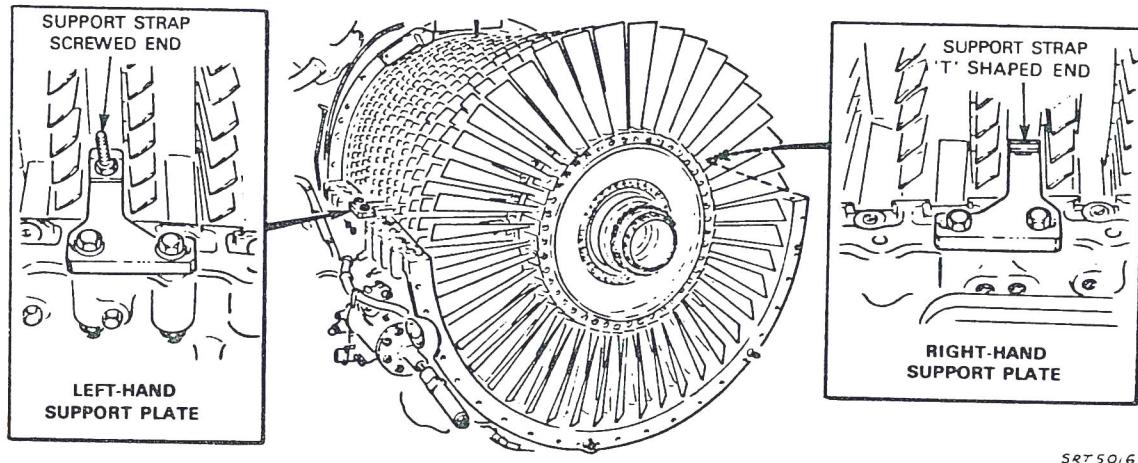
Rotor assembly supported by stage 6 support plates and strap
